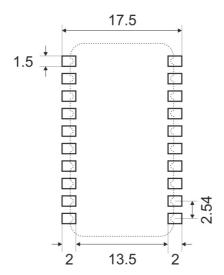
Recommended solder pad layout. All dimensions are in millimeters. Note the drawing is not to scale.
